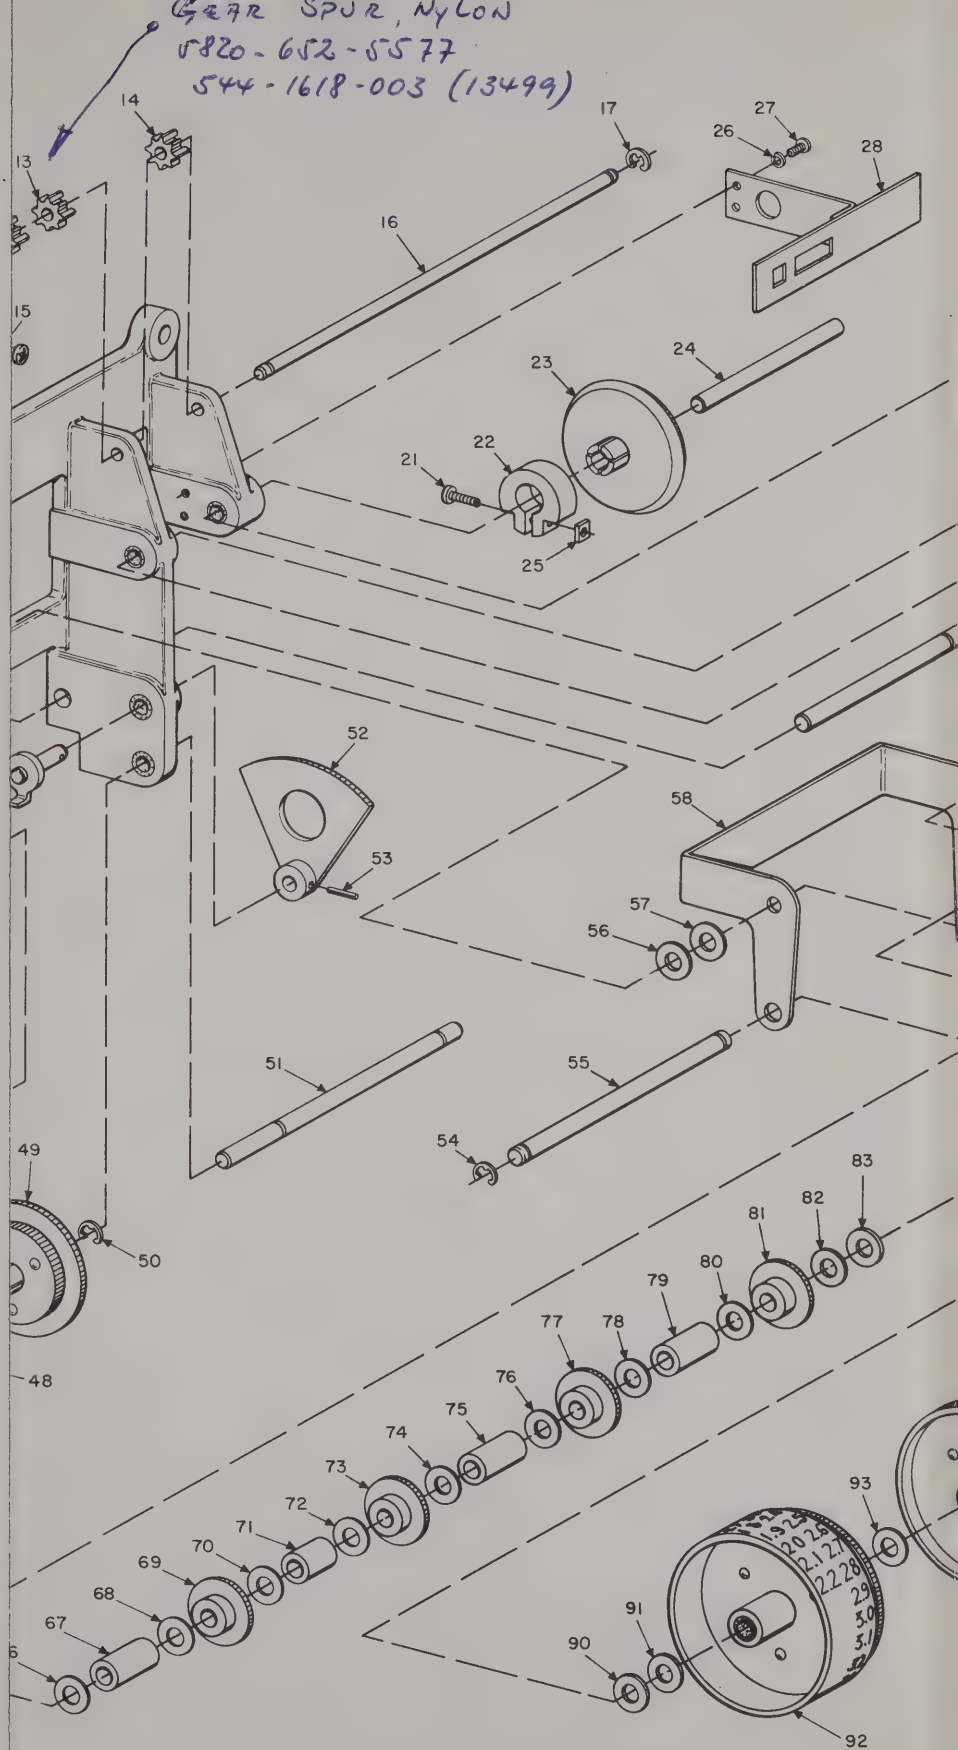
Frequency counter dial assembly, exploded view—Continued.
